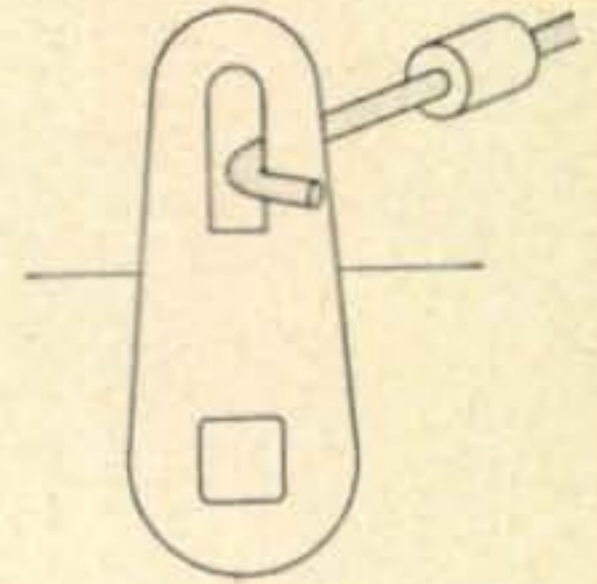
Component lead passed through terminal hole and looped back to form a hook, which should be crimped using long-nose pliers.
